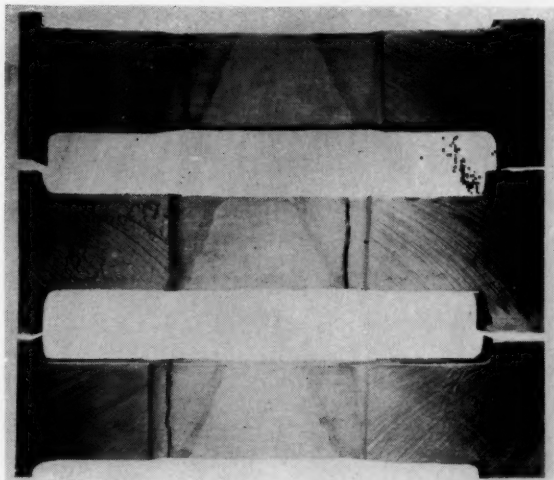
TENSILE SPECIMEN REDUCED IN AREA OF WELD TO CONCENTRATE APPLIED STRESS IN THE DEPOSIT. WELD IS STRONGER THAN CAST SECTION. RUPTURE OCCURRED AT 62,000 TO 70,000 LBS. PER SQ. IN. AS DETERMINED BY THE CASTING STRENGTH.
